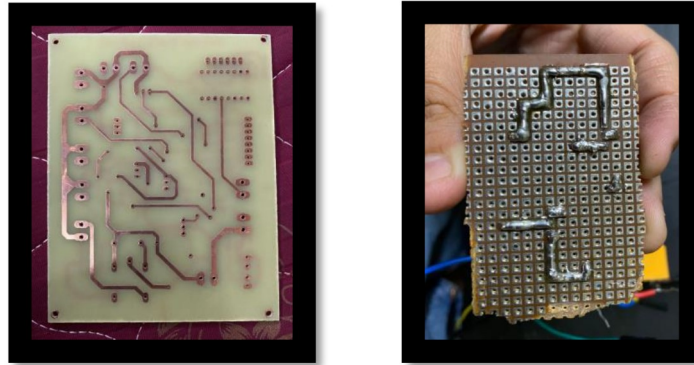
The printed PCB traces (left) and the recreated circuit on a perforated board(right)
